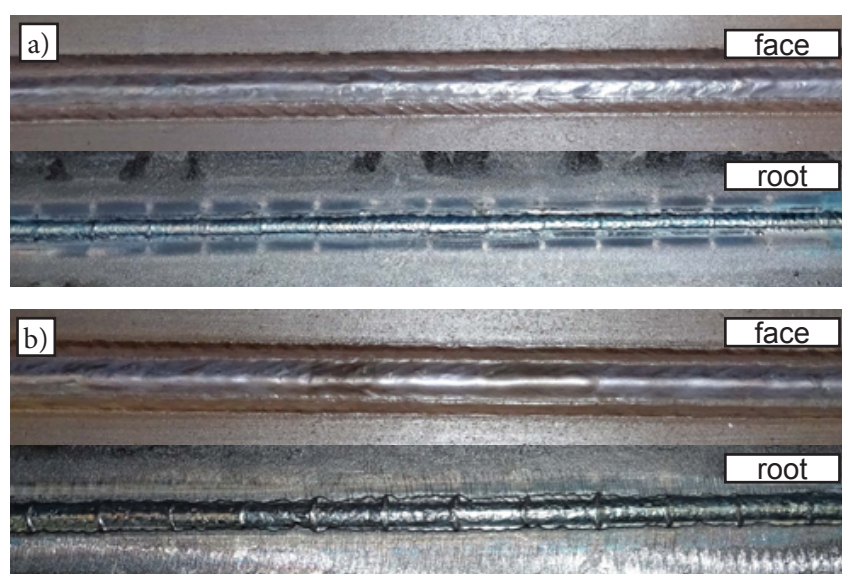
Face and root of the weld in the welded joint made of steel S960QL once (a) and two times (b)
